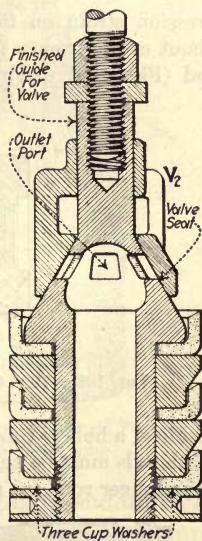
Cross Section Of Pump Plunger Shown In Fig. 104.
